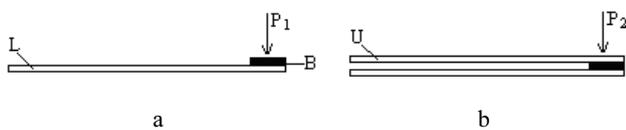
Principle scheme of fabric specimen layers (L and U) bond using adhesive film (B)
